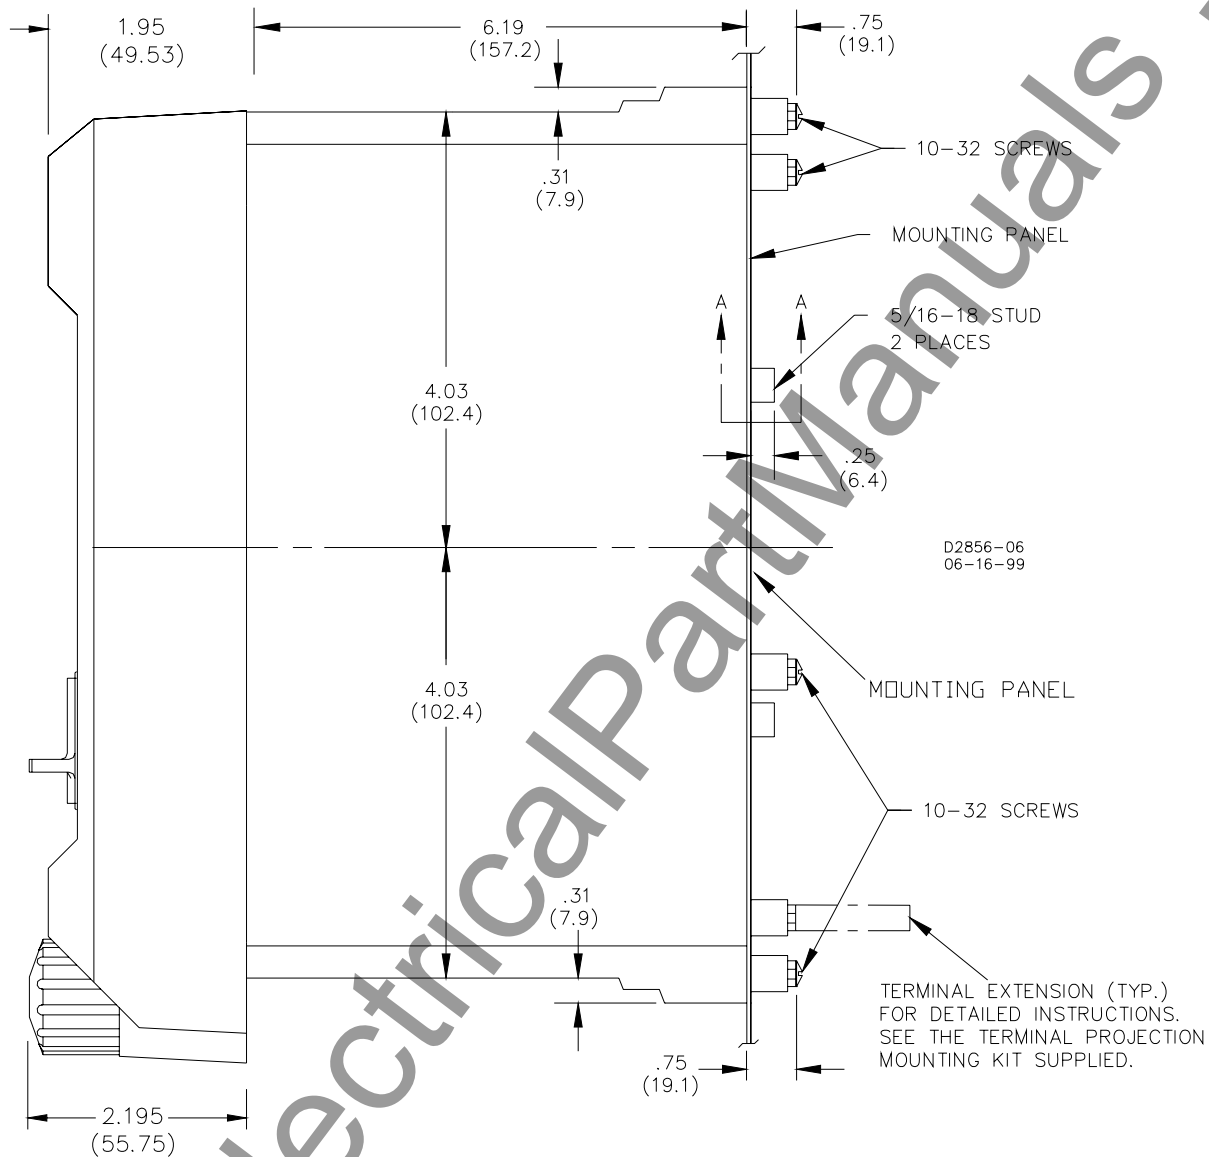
Case Dimensions, Side View, Double-Ended Projection-Mount Case
